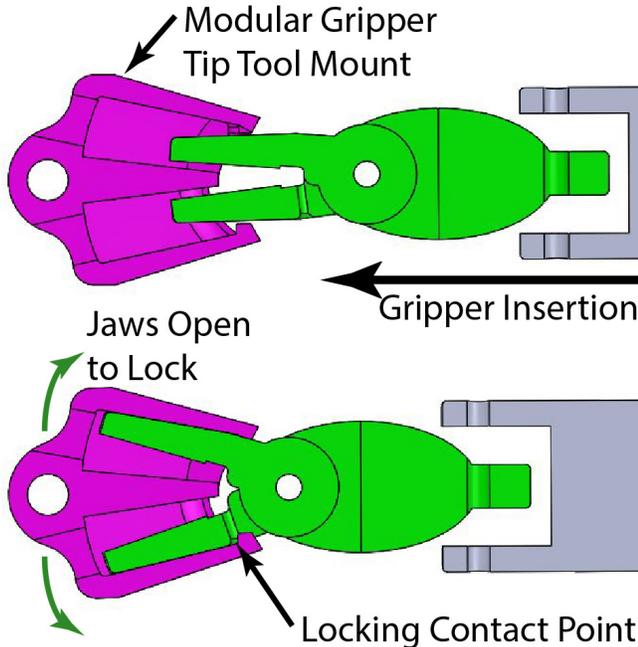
The Jaw-Tip mount allows a smaller form factor and can be 3D printed as a single piece shown in purple (requiring no additional manufacturing steps). This component can be added to surgical peripherals to interface the Robotic Surgical Assistant to a wide variety of user-defined devices.
